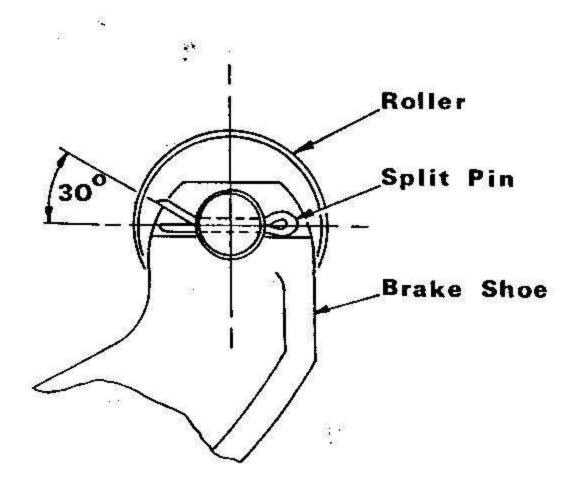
SECURING BRAKE PIN ROLLER PIN
